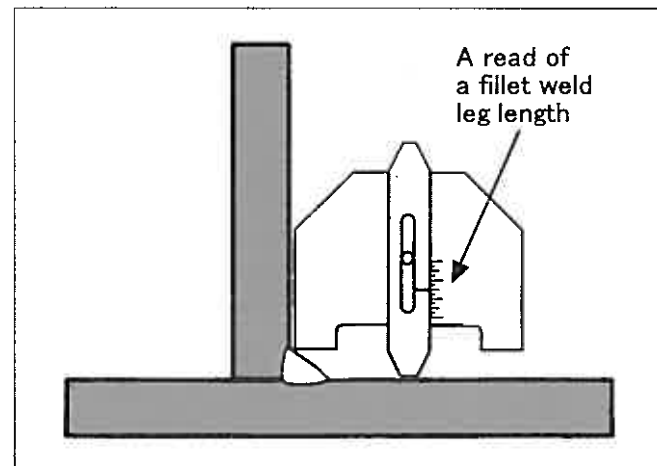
Measuring a fillet weld leg by means of a multipurpose welding gage
